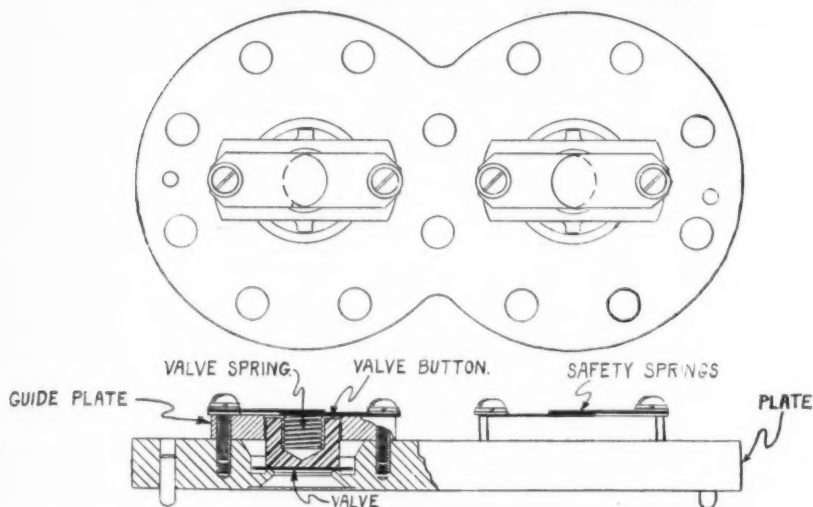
Discharge valve assembly used in larger commercial compressors.
